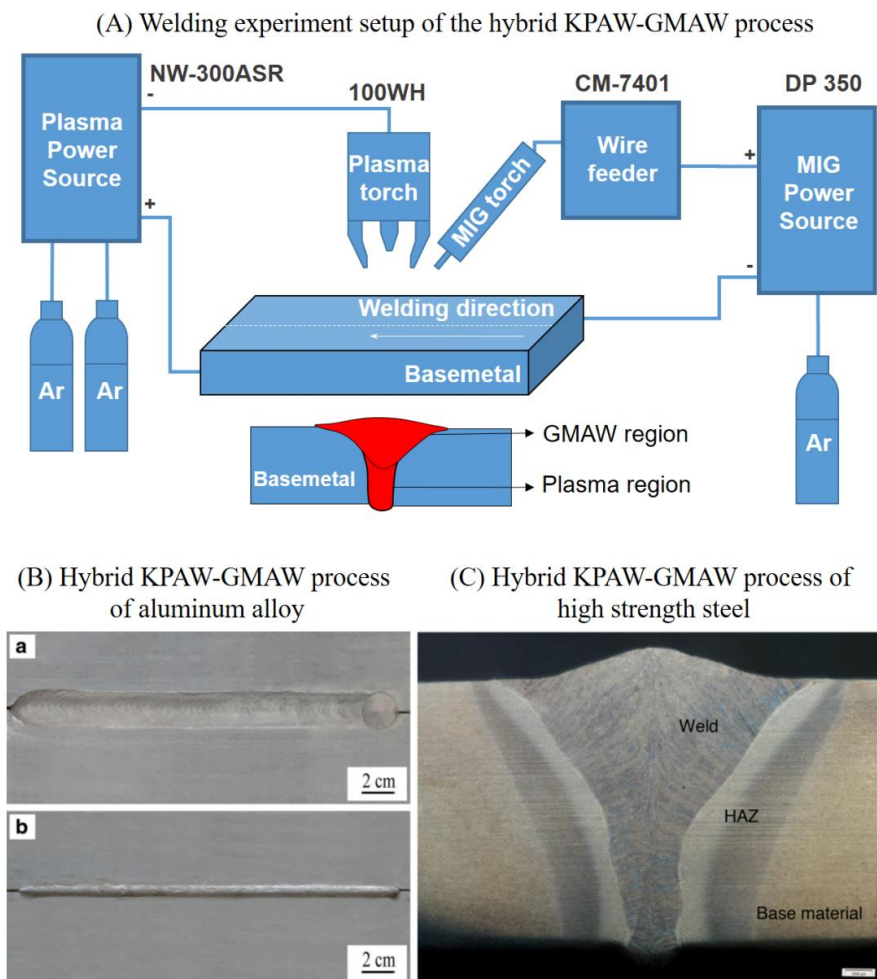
(A) The welding experiment setup of the hybrid KPAW-GMAW process; (B) Hybrid KPAW-GMAW process of aluminum alloy; (C) Hybrid KPAW-GMAW process of high strength steel
